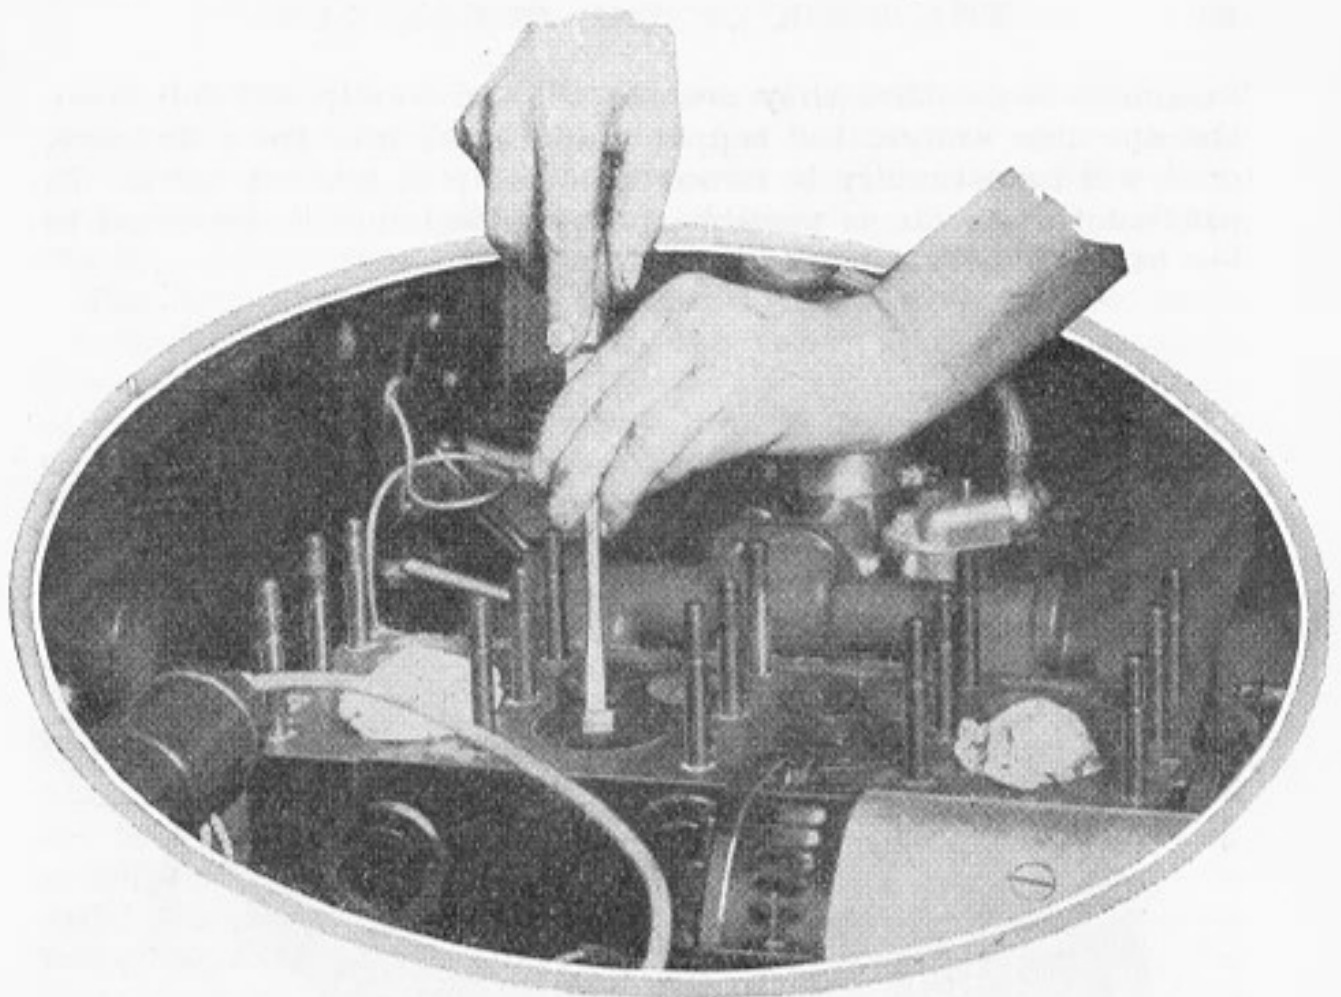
A BLUNT INSTRUMENT, SUCH AS A SCREWDRIVER, SHOULD BE USED TO REMOVE THE CARBON DEPOSIT
